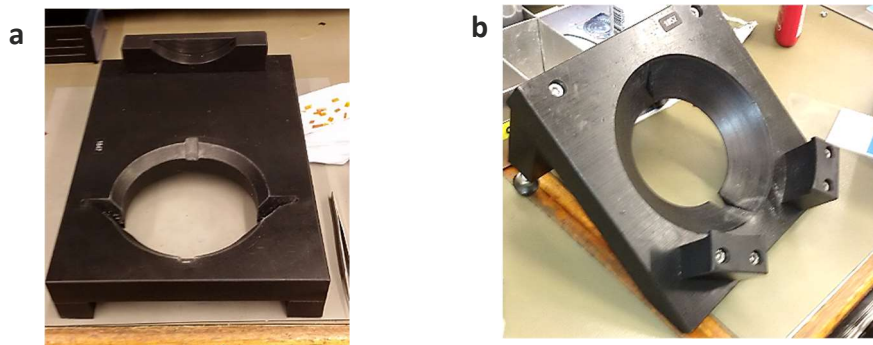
a) Principal fixture for rear shell; b) Fixture use to add inclination.
